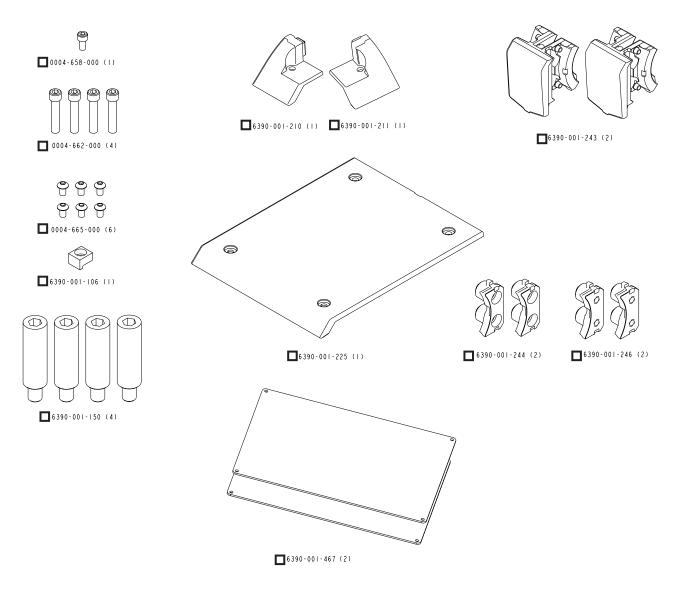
Power-LOAD Assembly Installation Kit Components (6390-001-054)
